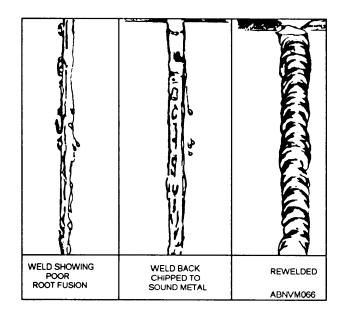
Chipping out the fused back side of a joint to make a high-quality weld.
